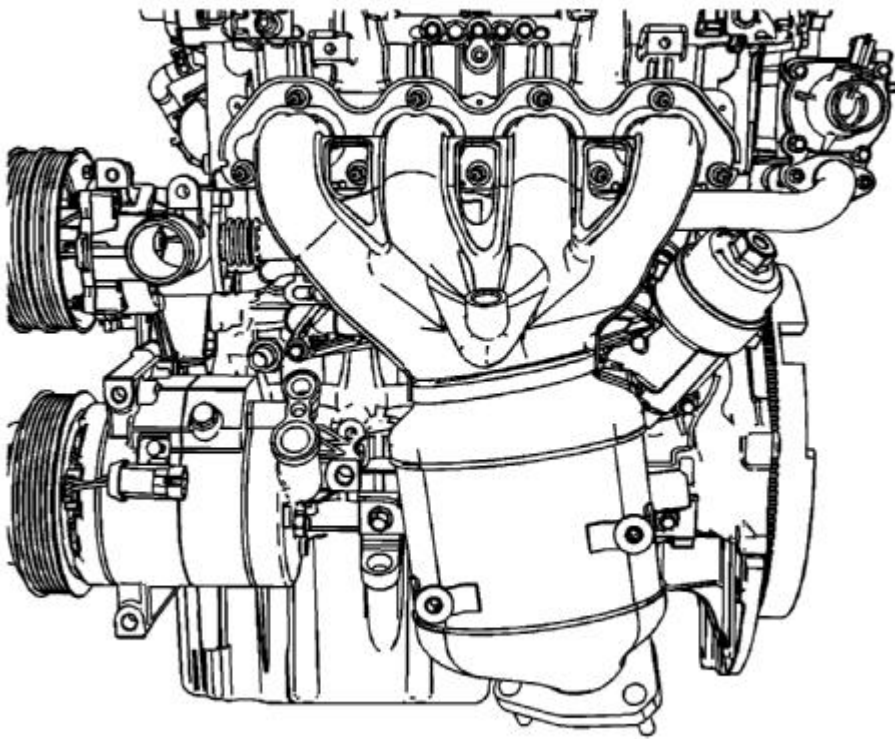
View of Exhaust Manifold And Catalytic Converter
